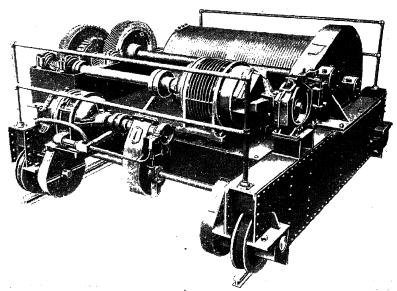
Standard 125-ton crane trolley. The trolley rolls on rails mounted on the bridge of the crane. Note (a) hoisting motor with ribbed case for rapid radiation of heat, (b) gear reduction for high mechanical advantage, (c) automatic setting brake on hoisting motor shaft, and (d) grooved drum to accommodate the hoisting cable. (Whiting.)
